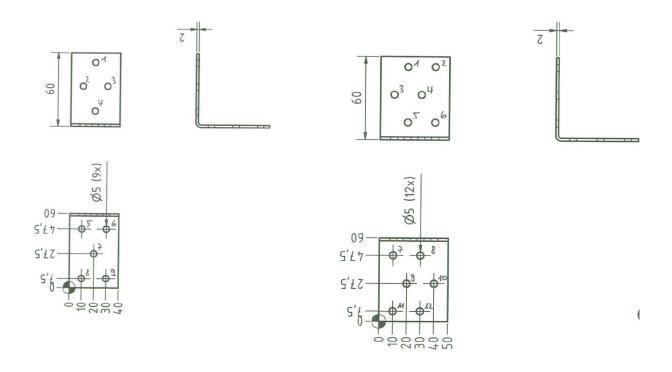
Dimensions of Angle Bracket 1213.1 Figure A. 12 Dimensions of Angle Bracket 1210
